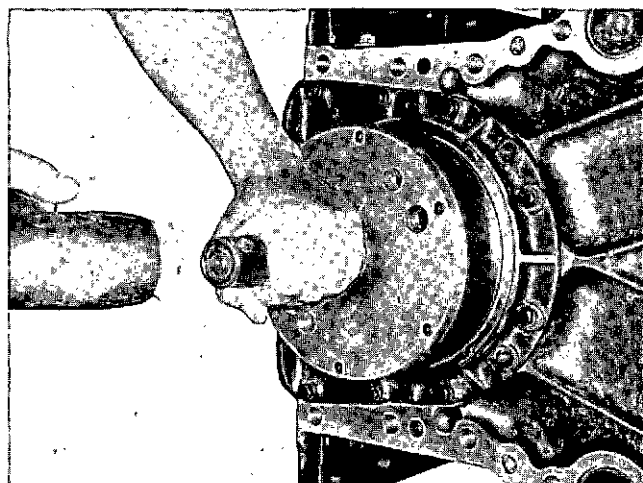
, V414216. Using ST-1093 Wear Ring and Oil Seal Driver
